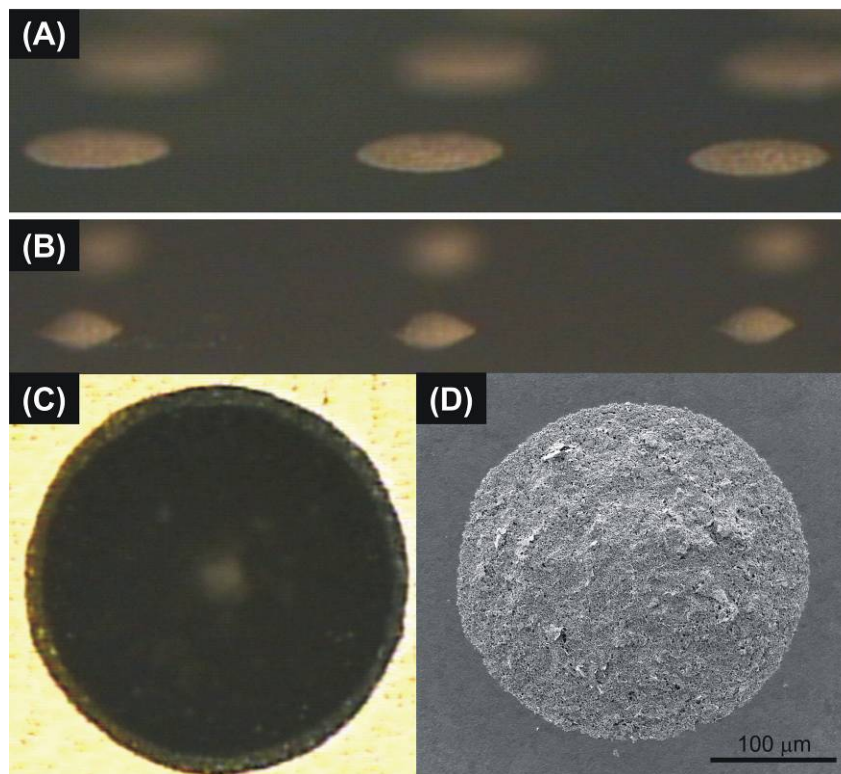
Noncontact printing of the ICA pastes with 80 wt % silver fillers on (A) a glass slide (side view, optical microscopy) with a radius of about 220 μm , (B) on an silver-plating lead frame with a radius of 130 μm (side view, optical microscopy), (C) on
